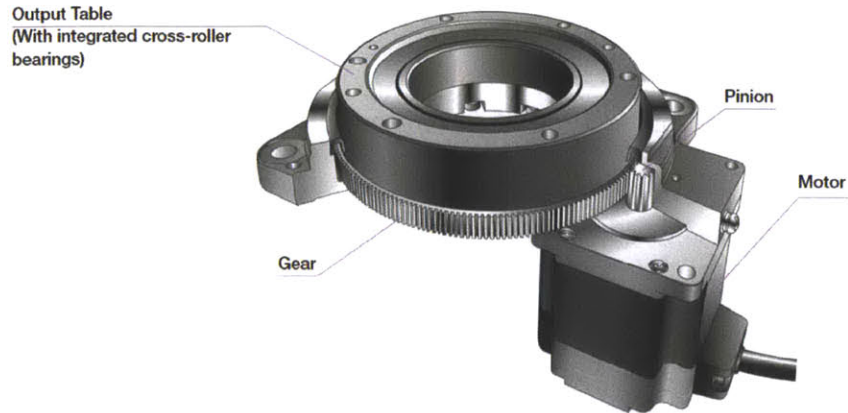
Pinion and gear based power transfer mechanism from the stepper motor to the output table [37]
